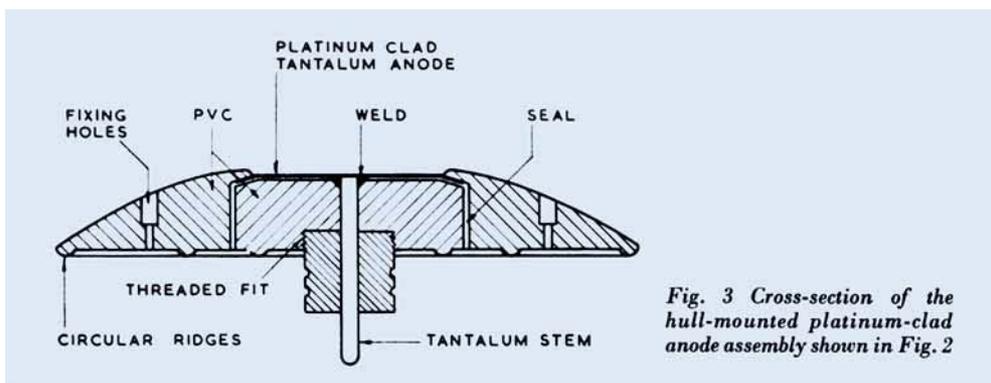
Cross-section of the hull-mounted platinum-clad anode assembly shown in Fig. 2
